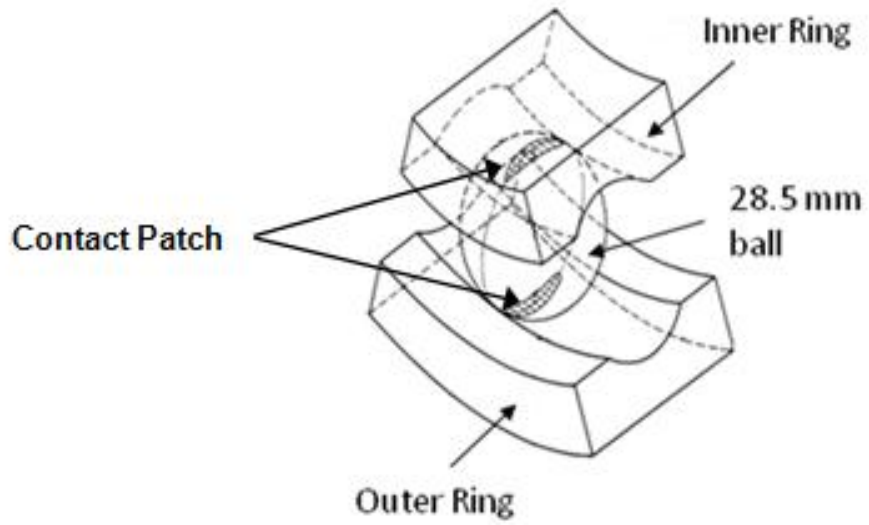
Schematic of a section of the ball bearing showing the contact patch formed between the ball and rings [23].
